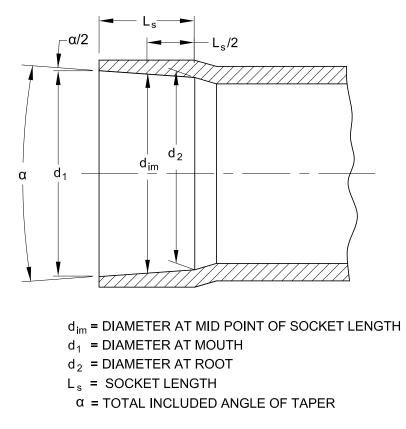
SOCKET DIMENSIONS FOR SOLVENT CEMENT JOINTS
